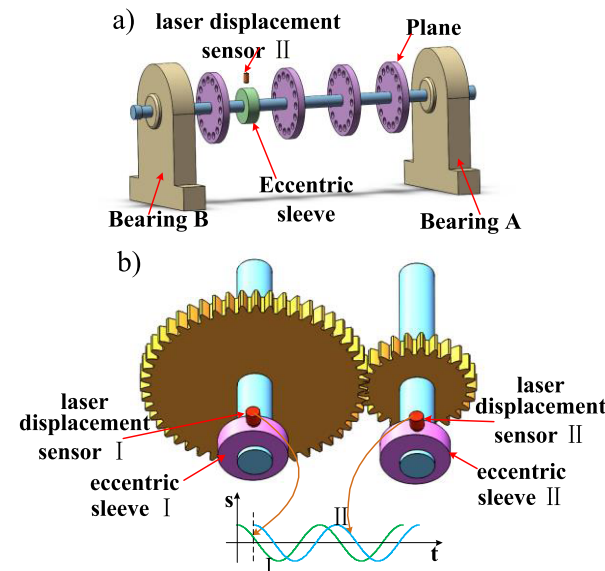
a) Rotor dynamic balance. b) Gear transmission error.
